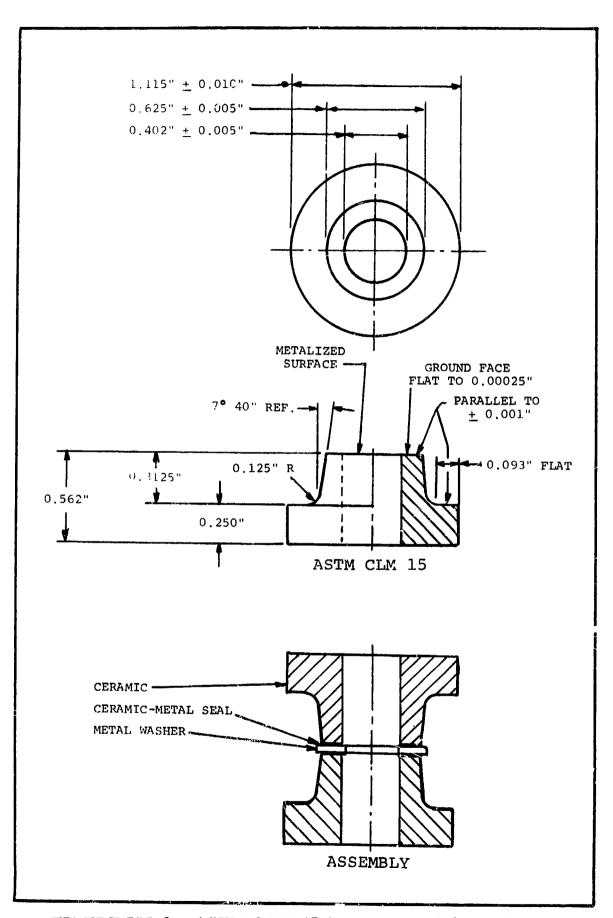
ASTM CLM 15 Specimen and Assembly
